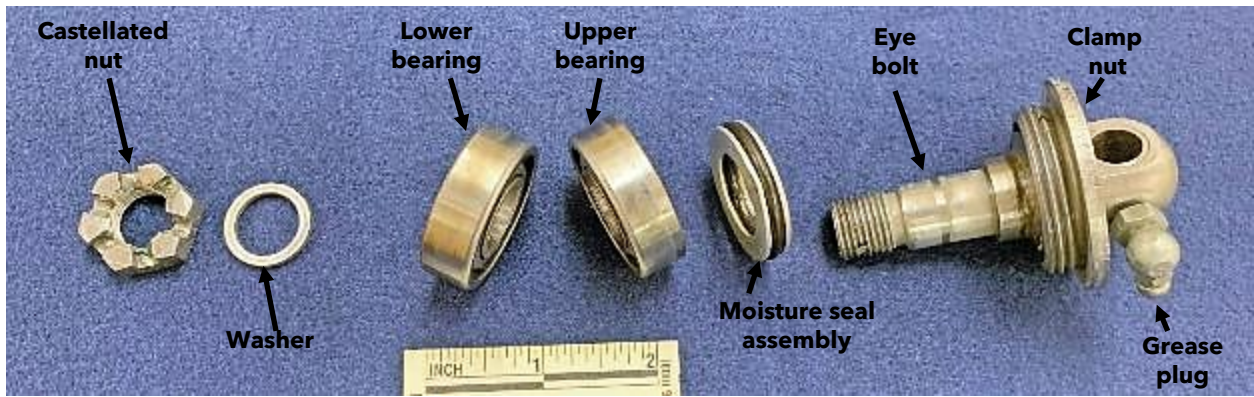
Eye bolt assembly in various stages of disassembly showing the castellated nut; washer; lower and upper bearing assemblies; moisture seal assembly; clamp nut; eye bolt; and grease fitting (left to right).
